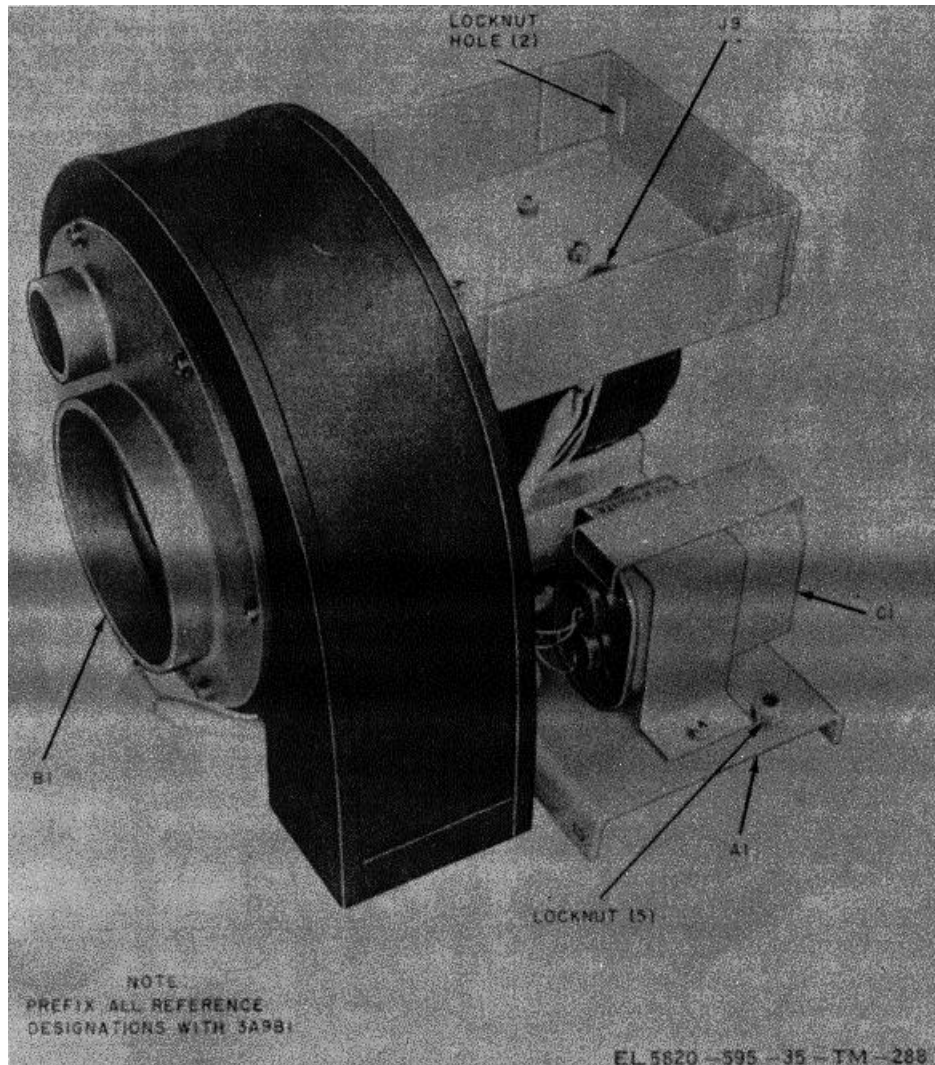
Blower assembly 3A9B1, right side view, parts location.
